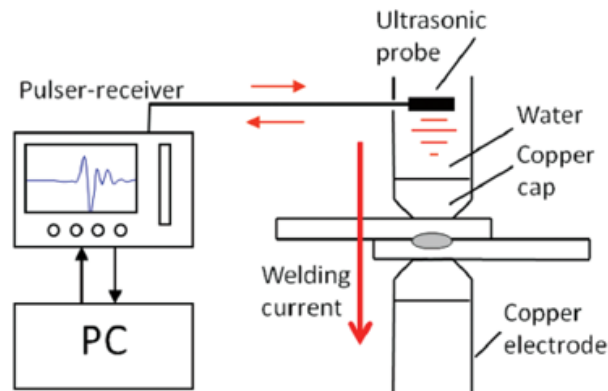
Schematic set-up of ultrasonic in-process spot weld analyzer [8].
